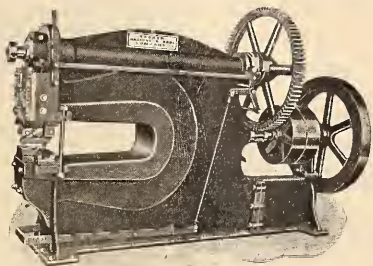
PUNCH AND SHEAR, BREMER MACHINE AND TOOL CO.
